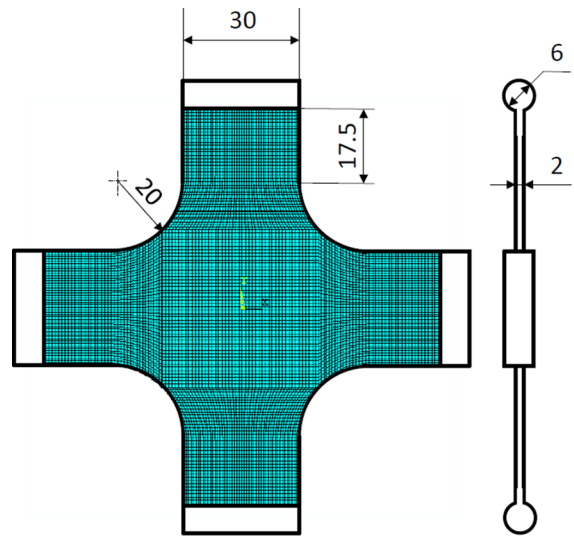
Geometry of the cruciform specimen. Dimensions in mm
